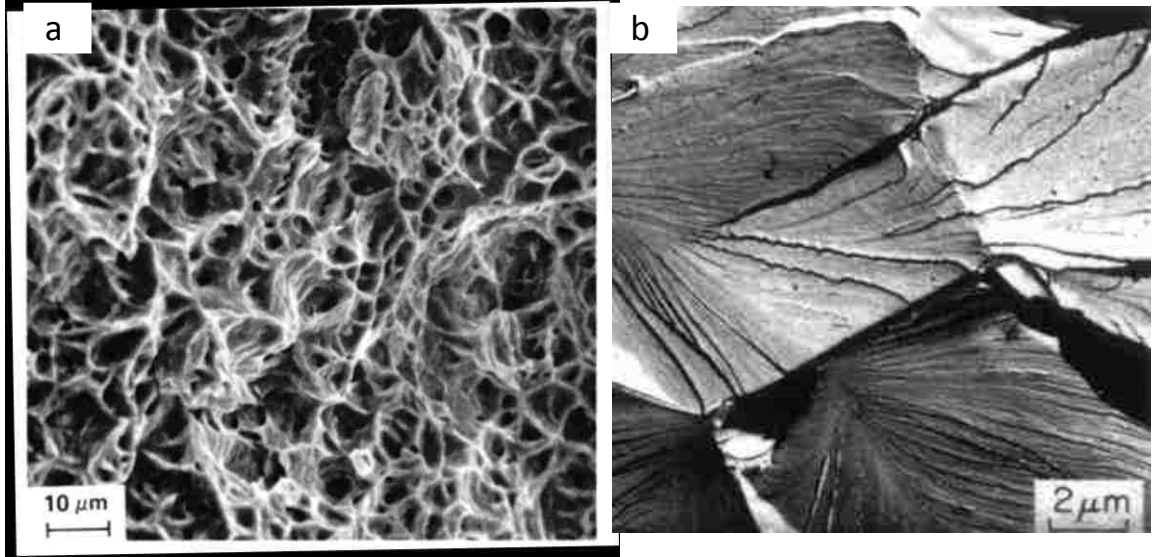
Typical SEM fractographs a) Ductile Fracture in 1020 steel [55]
